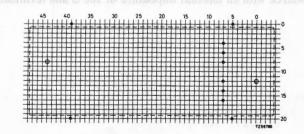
Hole pattern for mounting on a printed-wiring board. e = 2.54 mm.
